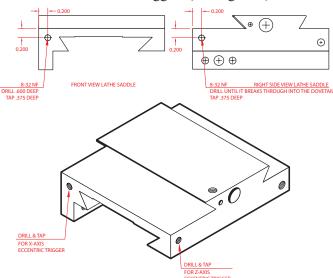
CNC leadscrew lathe saddle 8-32 hole locations diagram for the eccentric triggers.
